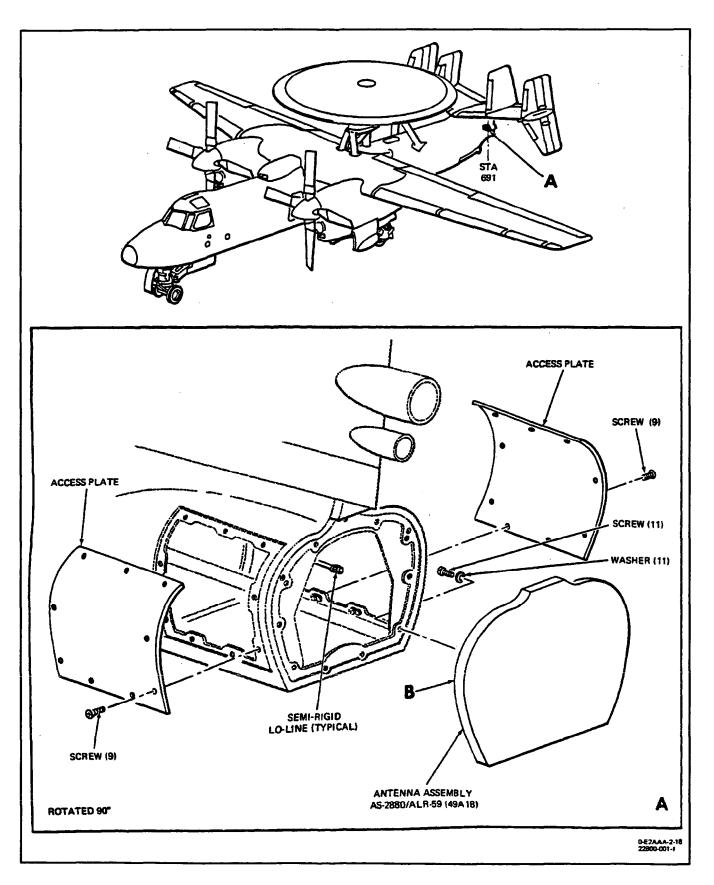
Removal and Installation of Antenna Assembly AS-2880/ALR-59 (Sheet 1 of 2)
